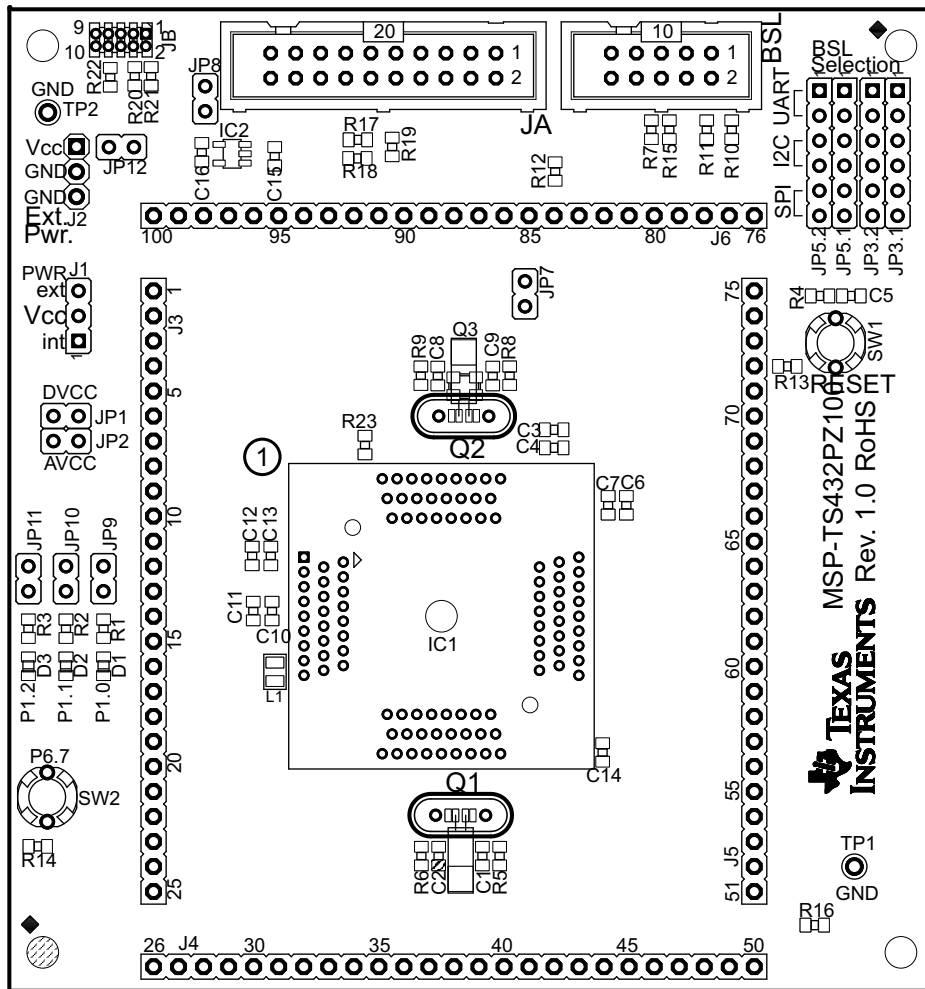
MSP-TS432PZ100 Target Socket Board, PCB
